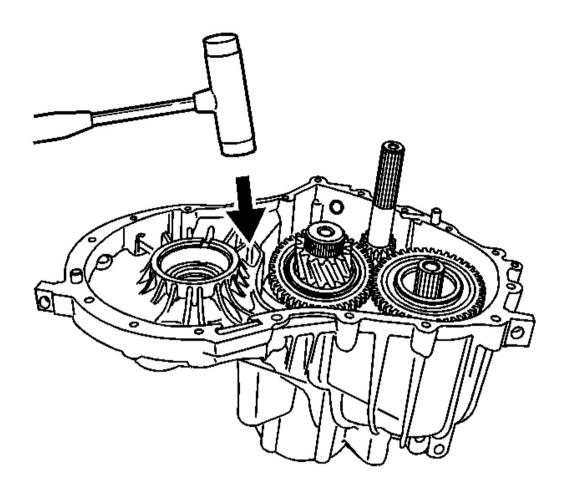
Taping Lightly On Case Mating Surface Using A Rubber Mallet Courtesy of GENERAL MOTORS CORP.
